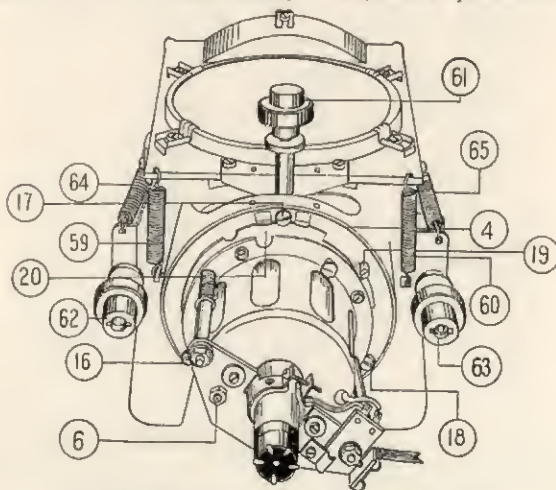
ADJUSTMENTS FOR MECHANICAL FOCUSING.
